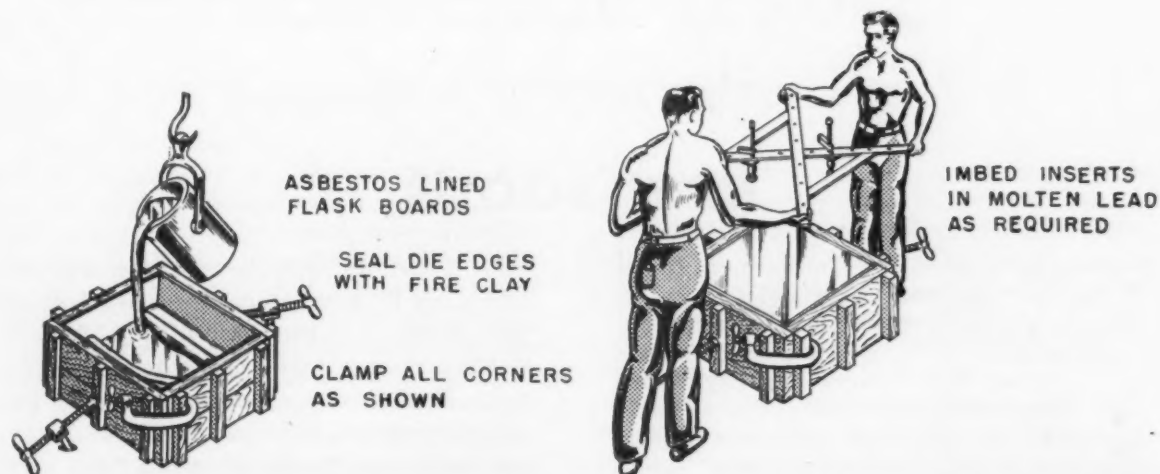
Casting the lead punch. An iron bolt holder is embedded in the molten lead to help attach punch to the platen.
